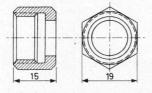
Cap nut type TE1051b (thread 3/8 in gas).
